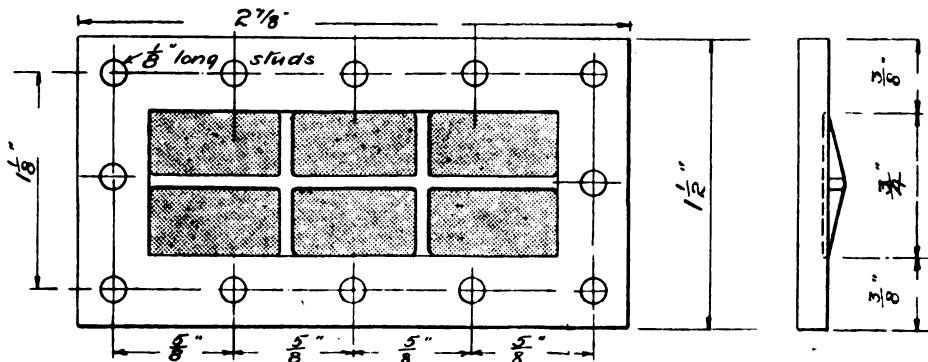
STEAM CHEST COVER. (Shaded part recessed may be painted.)
